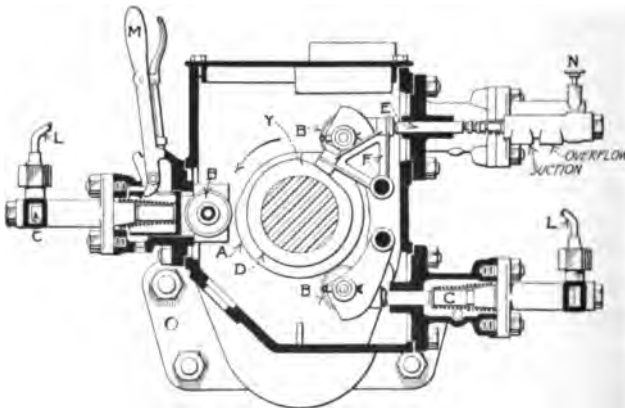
Fairbanks-Morse vertical type Y engine fuel pump for three cylinder engine.
